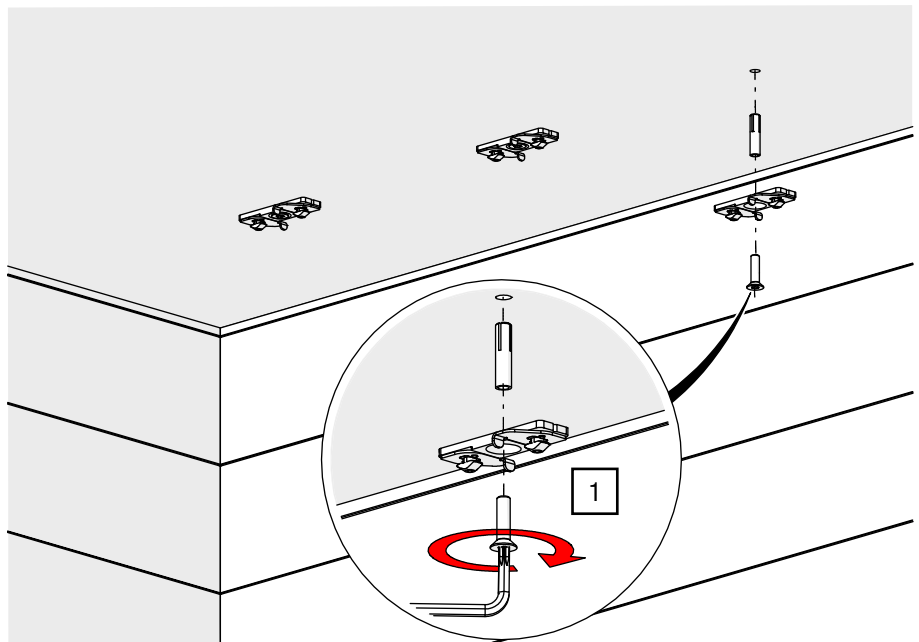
Ceiling installation – Screw ceiling mount bracket into ceiling
